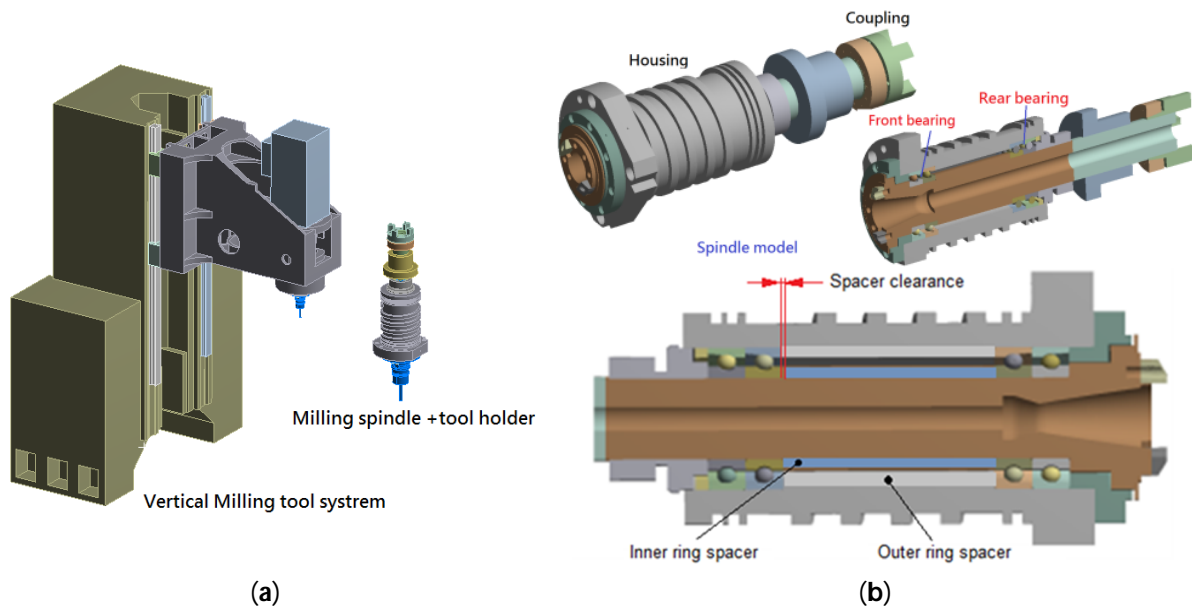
Solid model of spindle tool system: (a) the whole solid model used in the FEM model; (b) details of the spindle with bearings and spacer clearance between the inner and outer ring.
